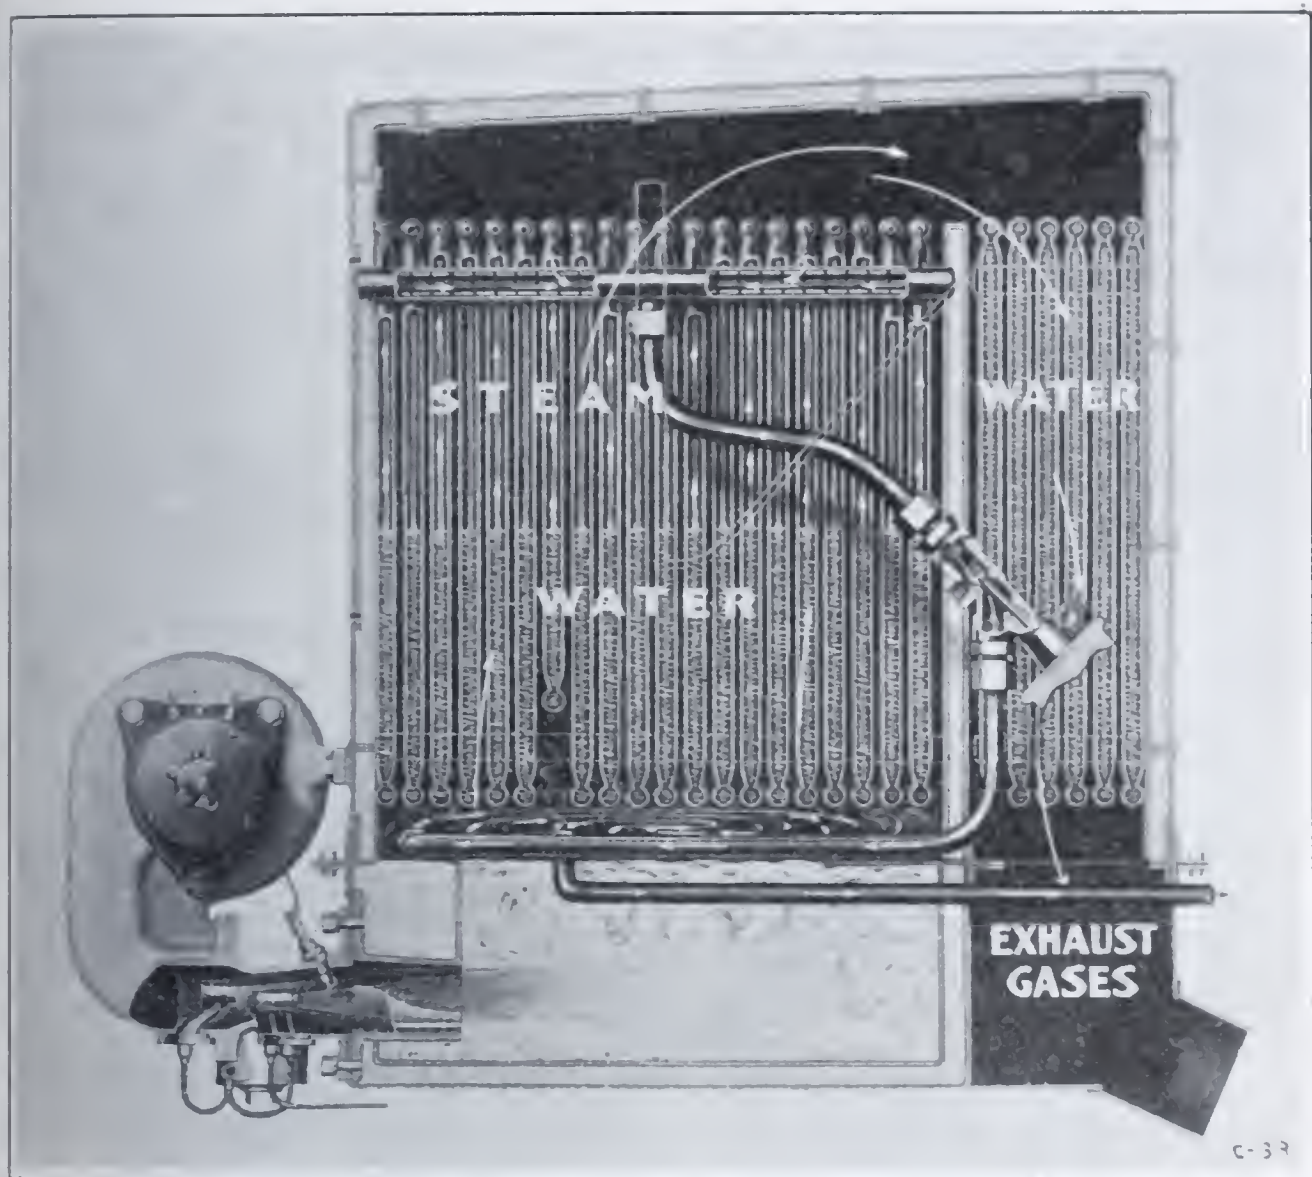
Cross-Section of Doble-Detroit Boiler.
